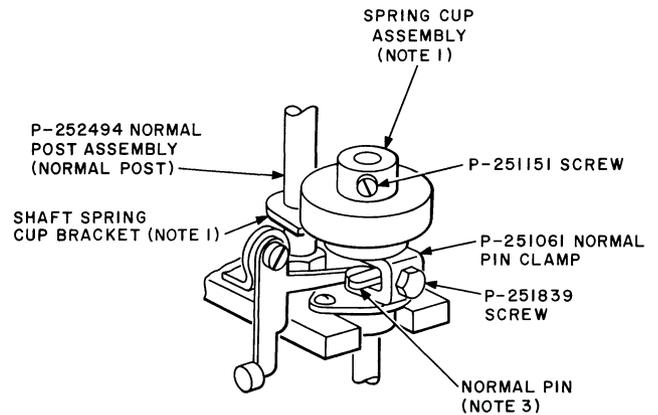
Cup-Type Shaft Spring Assembly and Associated Parts - Assembly Without Normal Post Collar
